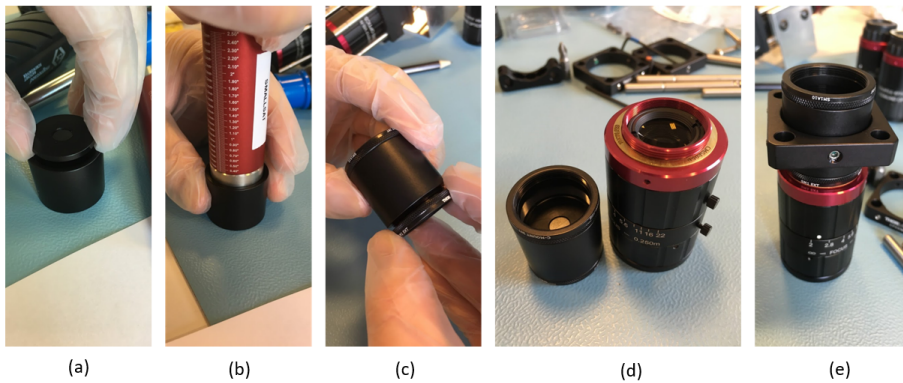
Slit tube assembly. (a) Insert slit into the lens tube, (b) adjust retaining rings inside the tube using the spanner wrench, (c) add adapter rings, (d) add objectives (with spacer rings if needed), (e) add cage plate before adding the second objective.
